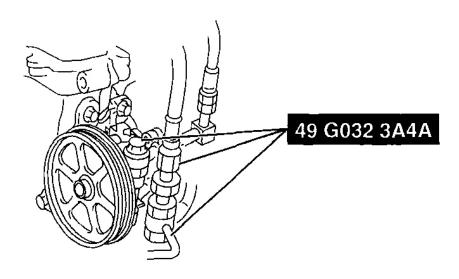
Assembling SSTs Courtesy of MAZDA MOTORS CORP.
